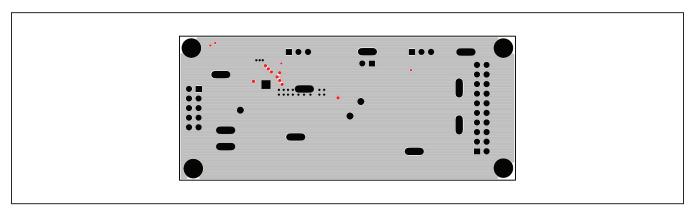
MAX20010 EV Kit PCB Layout—Solder Side
